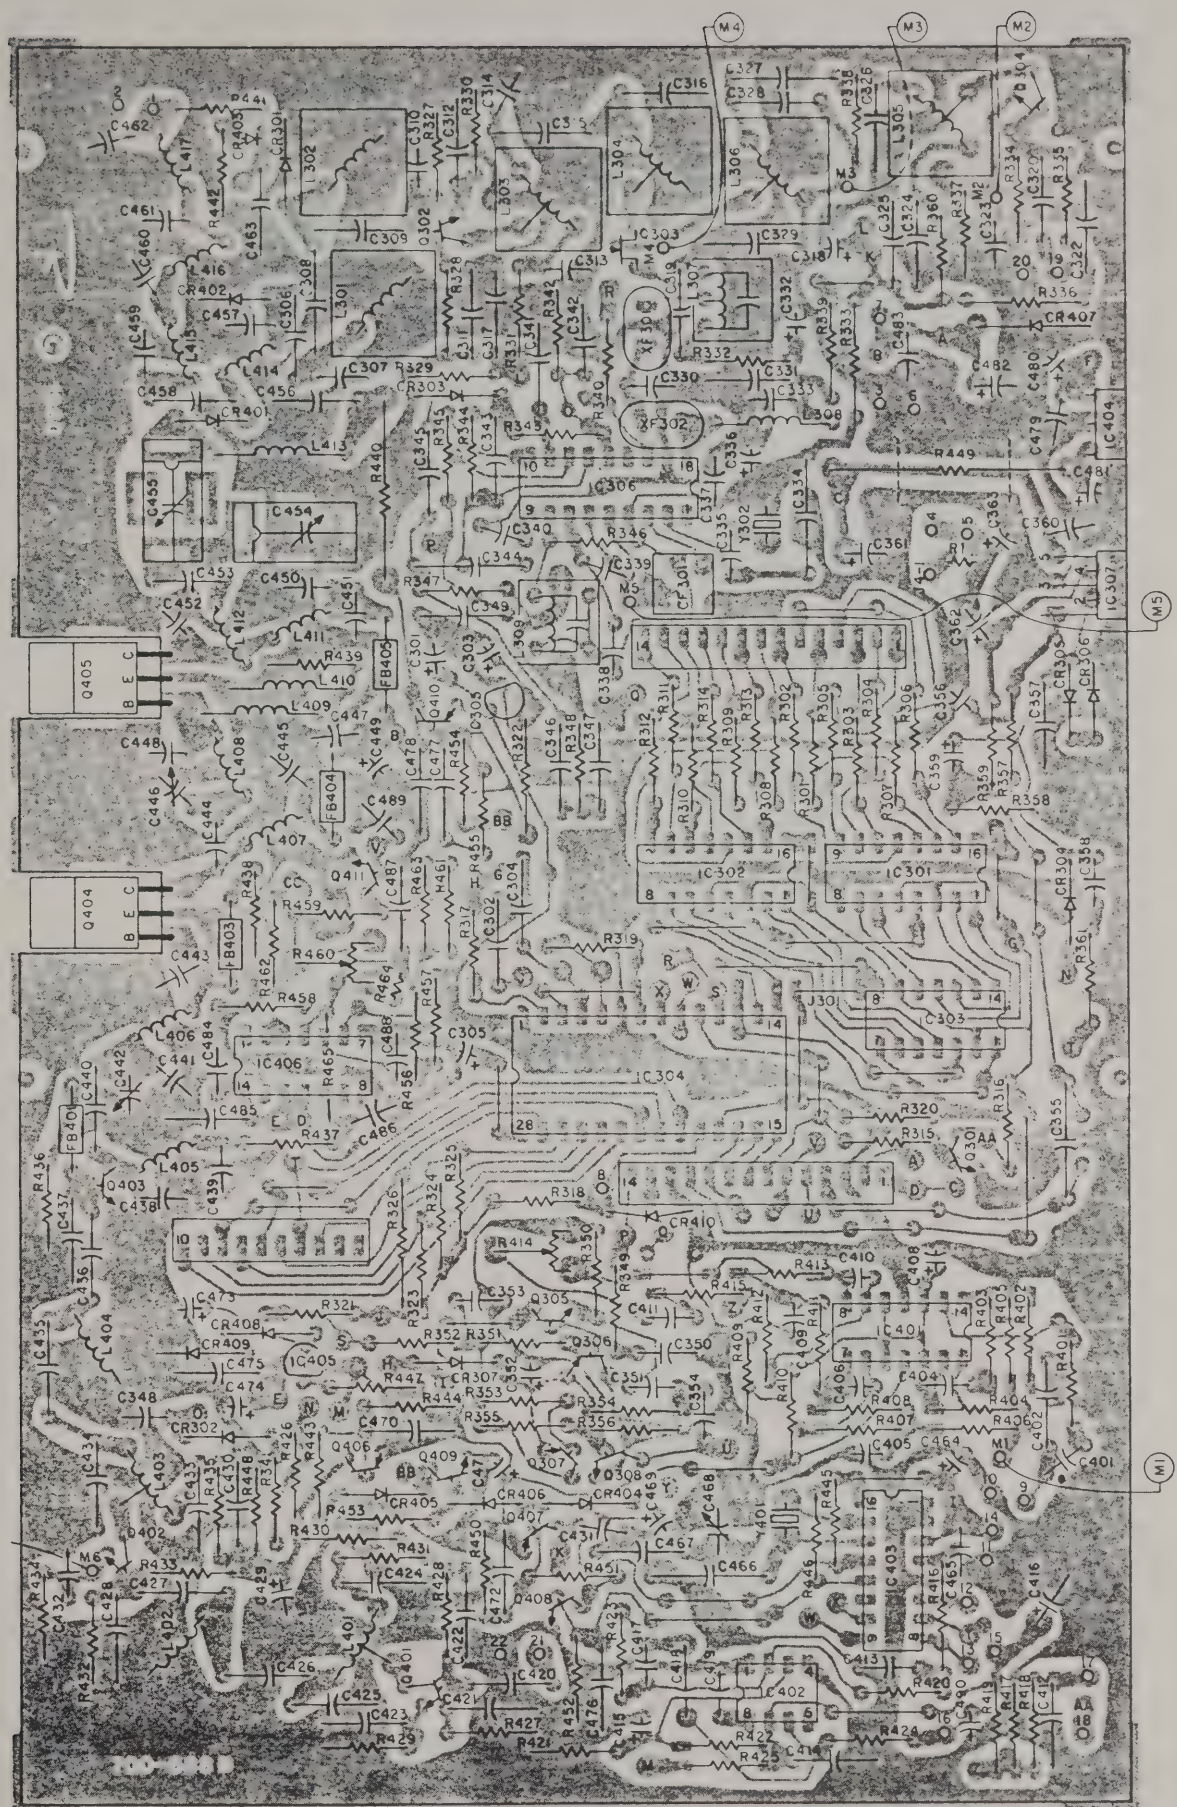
B. Parts Placement, Main PCB Assembly; Bottom View.
